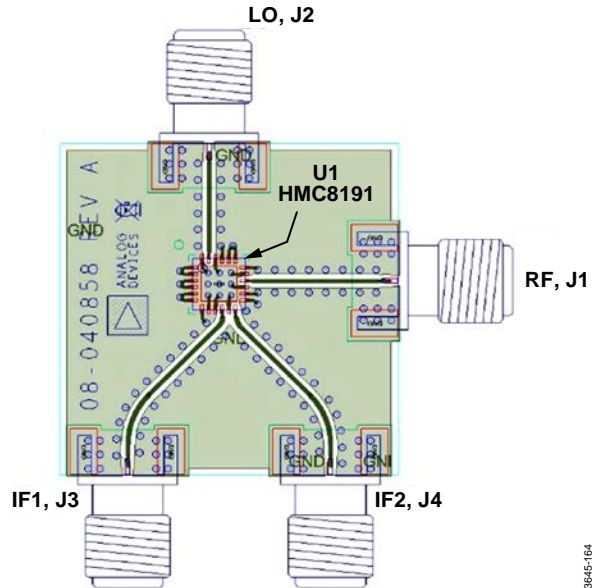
EV1HMC8191LC4 Evaluation Board PCB, Top Layer
